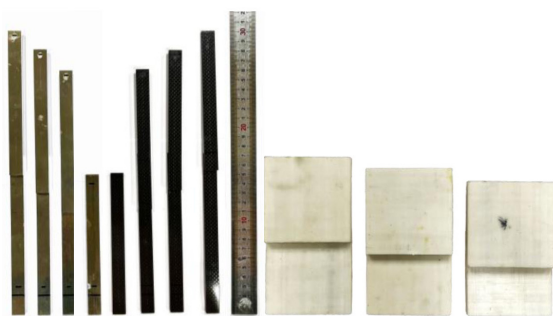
Experimental specimens with single specimens and single lap jointed specimens
